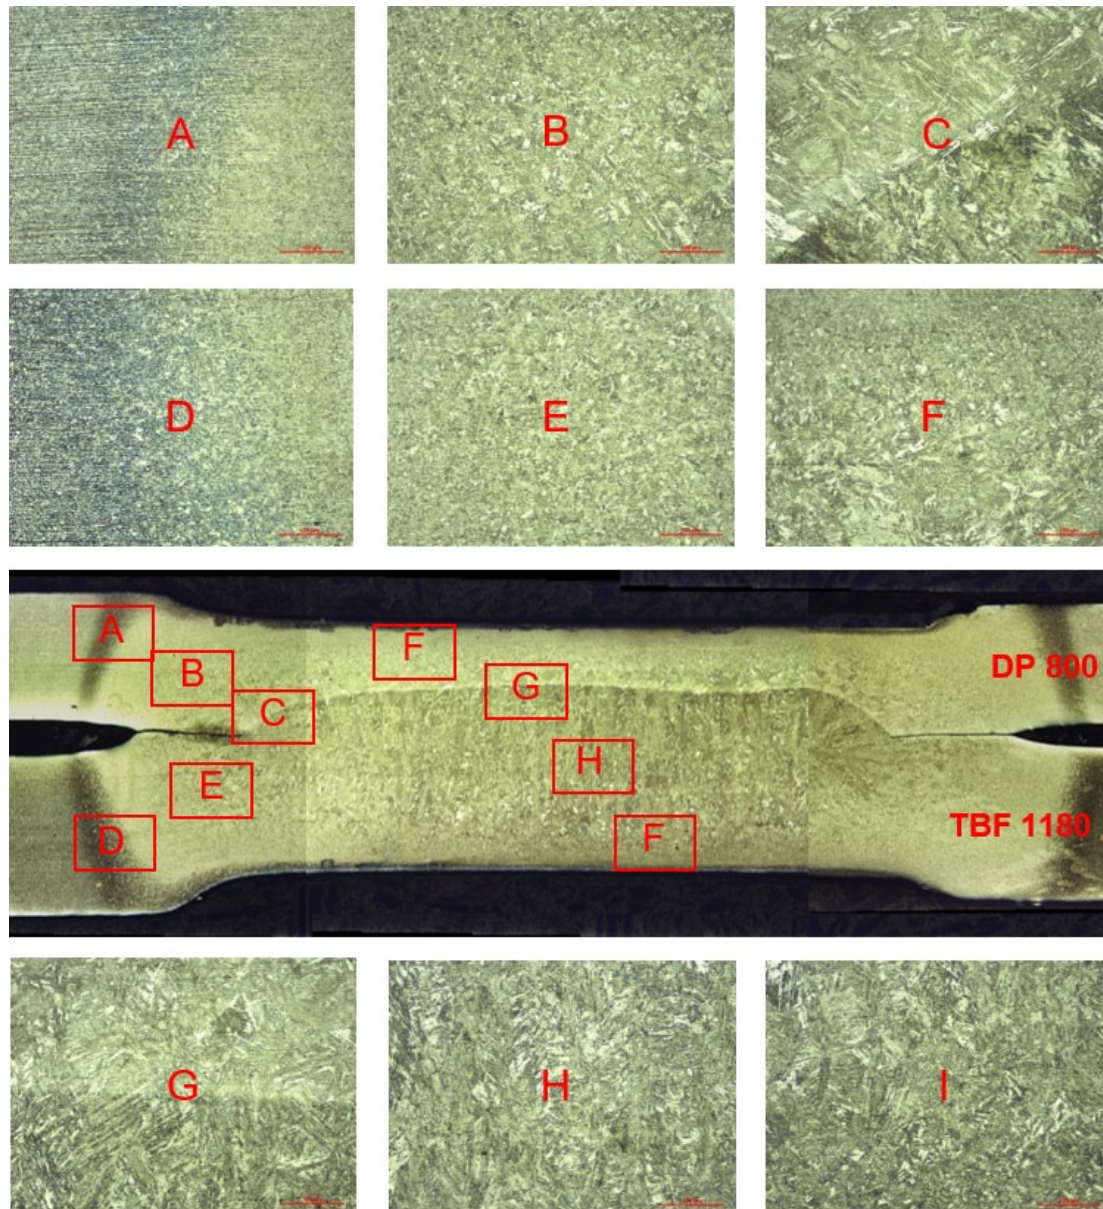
Micro structural investigation on the intersection of the S3 welded joints
